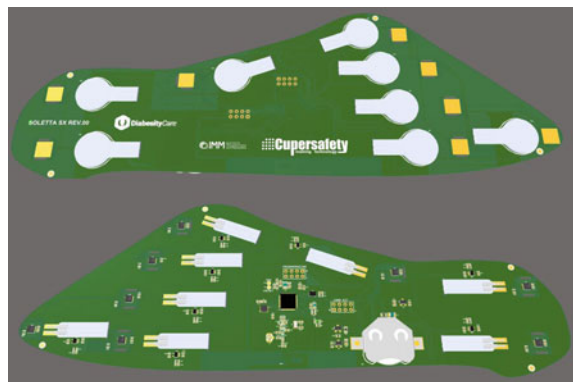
a Top and b bottom view of the smart insole prototype
